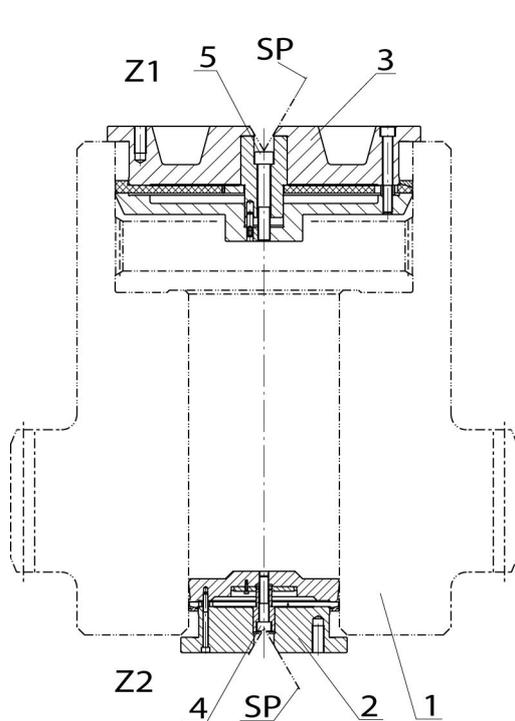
Flat-mandrel clamping elements as centring inserts in a hollow shaft.
